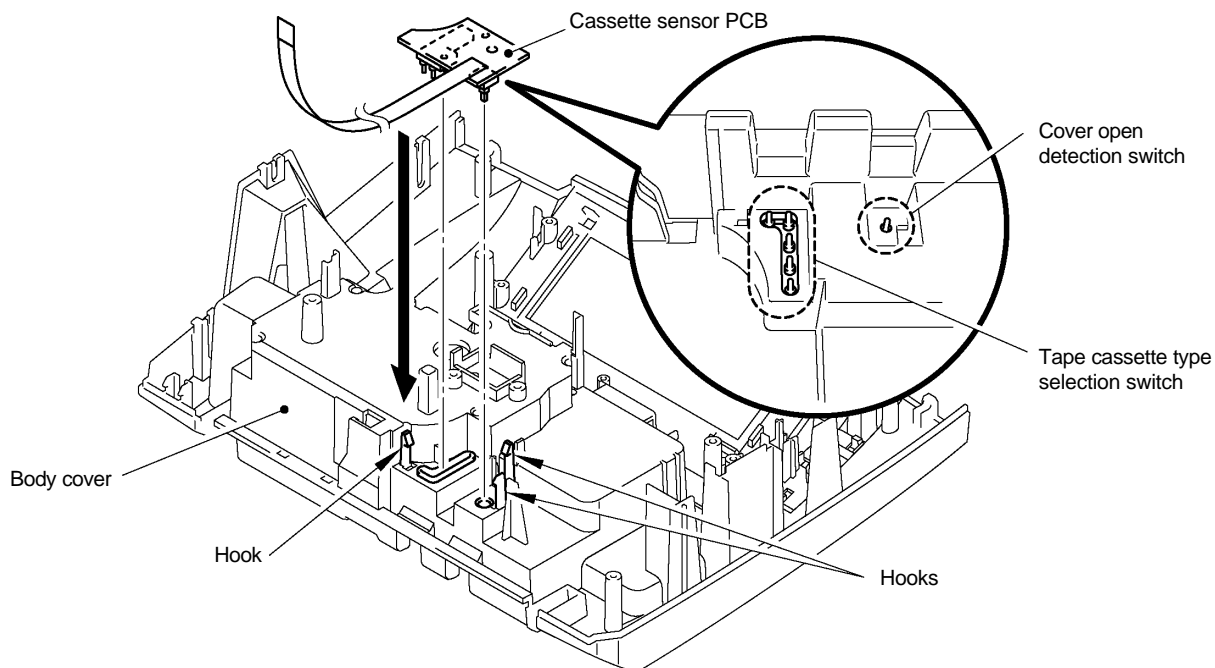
Reassembling the Cassette Sensor PCB
